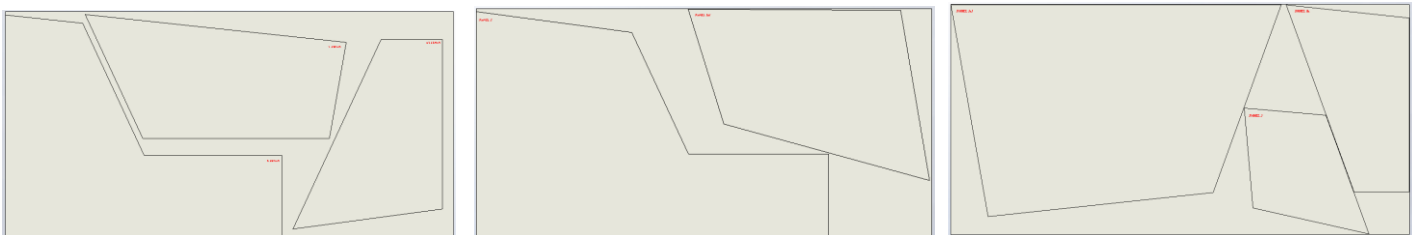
Solidworks drawing of laser cutting guides, arranged in tight packing on three 4'x8' sheets to accommodate both the maximum available MDF sheets as well as the maximum dimensions of the laser cutter.
